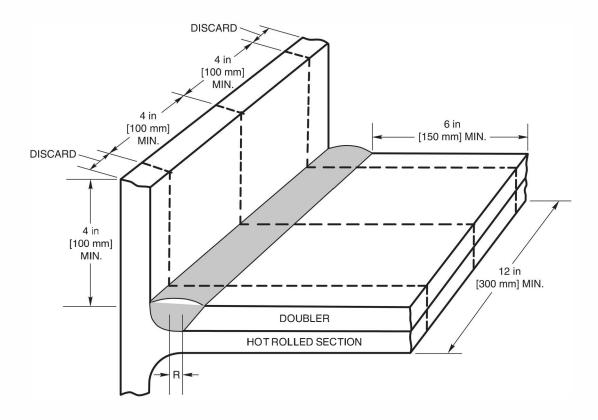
Doubler Weld Soundness Test (See 4.3)
